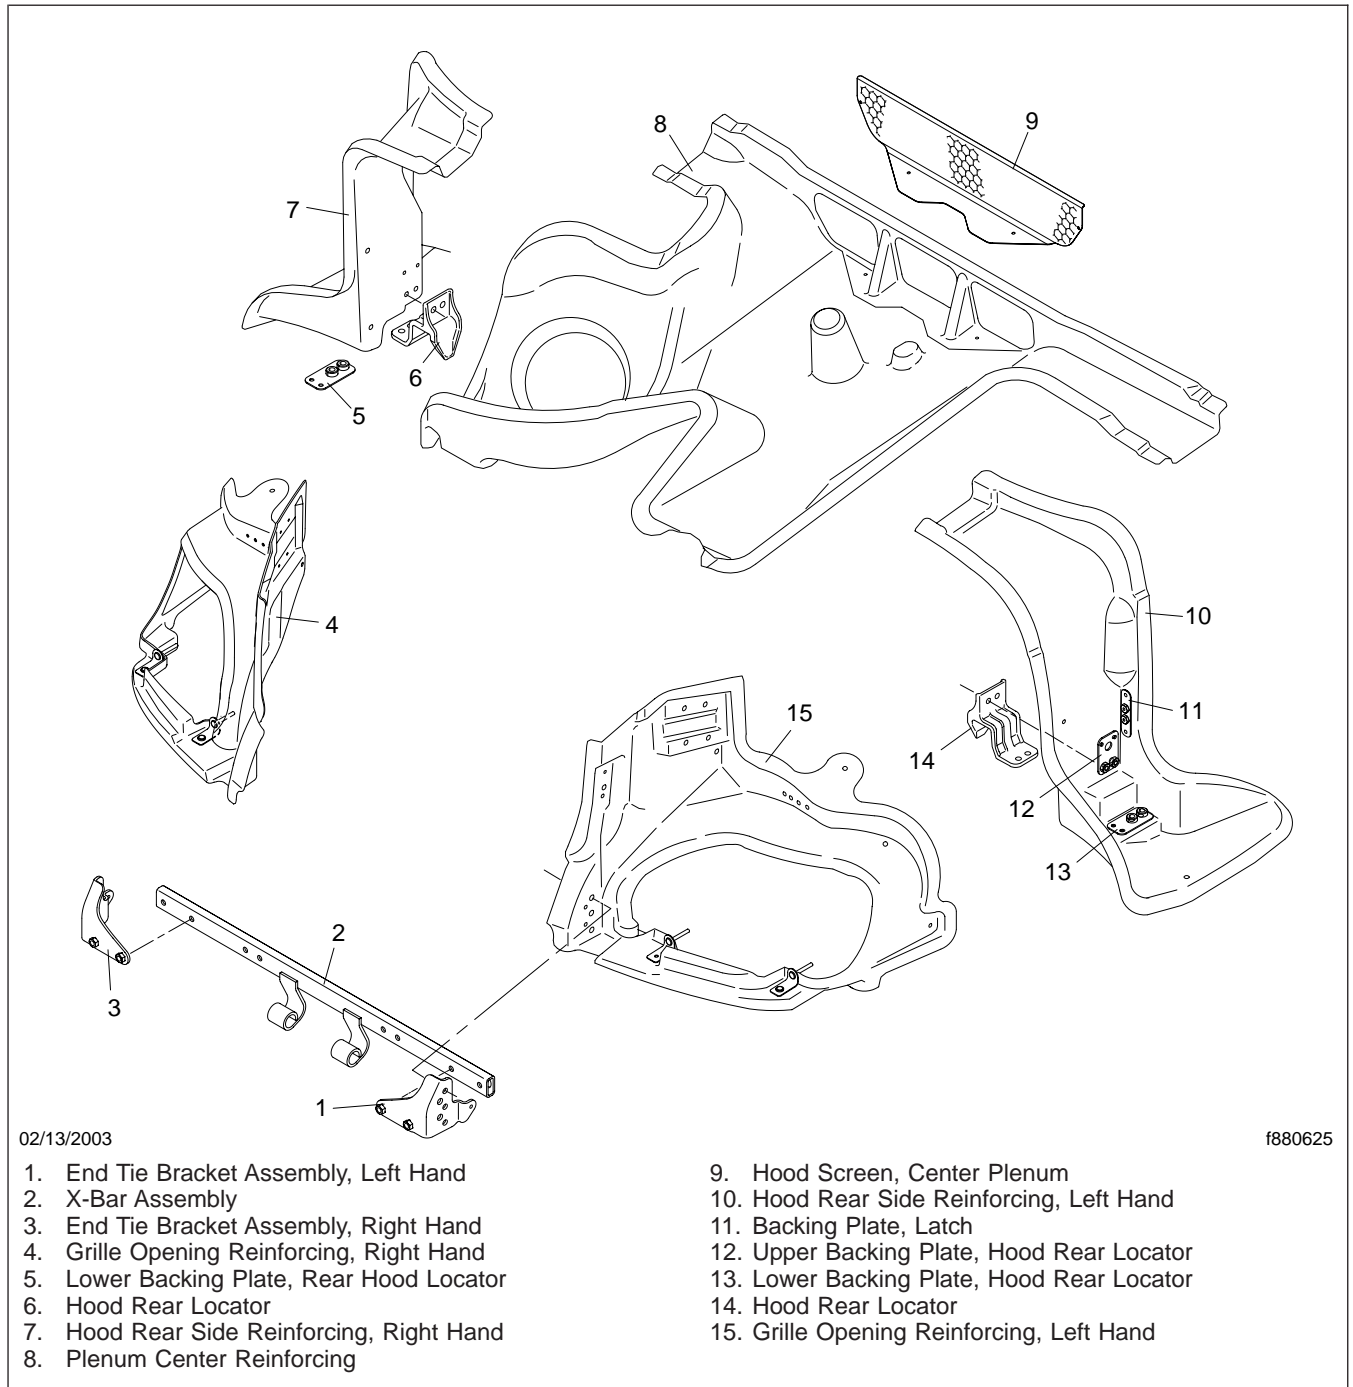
, Columbia 112 (Spray-Up) Hood Assembly Components
